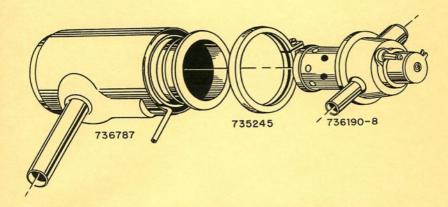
HEAT EXCHANGER & BURNER ASSEMBLY 736788
